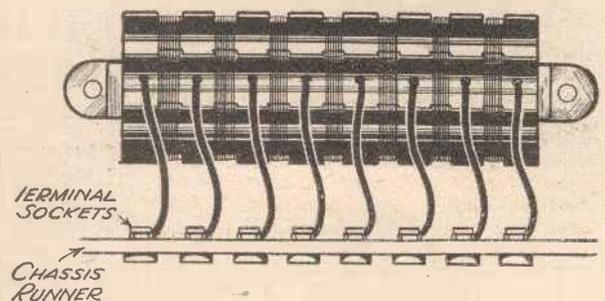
Showing how the potential divider is mounted on the underside of the chassis and flexible leads taken from the tappings to terminal sockets mounted on the chassis runner.
